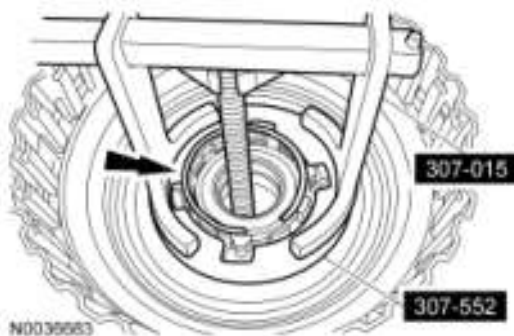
Removing Direct Clutch Return Spring Retainer Using Special Tools (307-015, 307-552)
